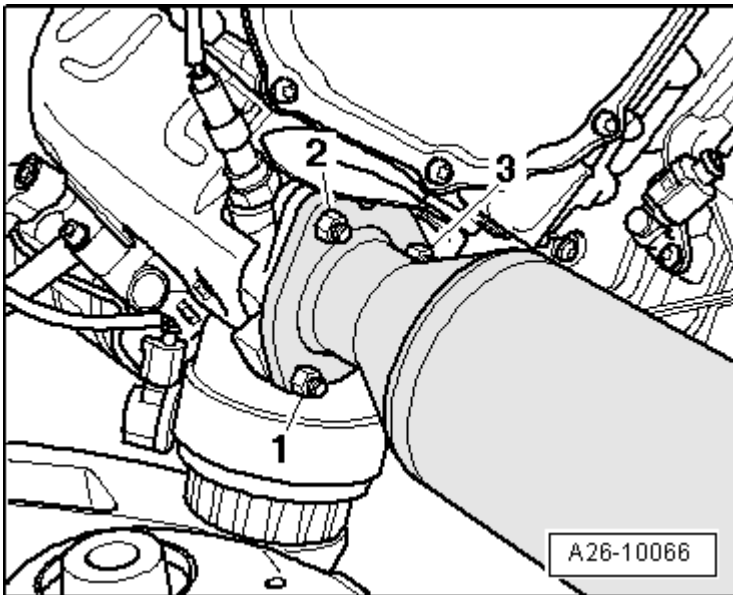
Removing Nuts & Left Front Exhaust Pipe With Catalytic Converter
